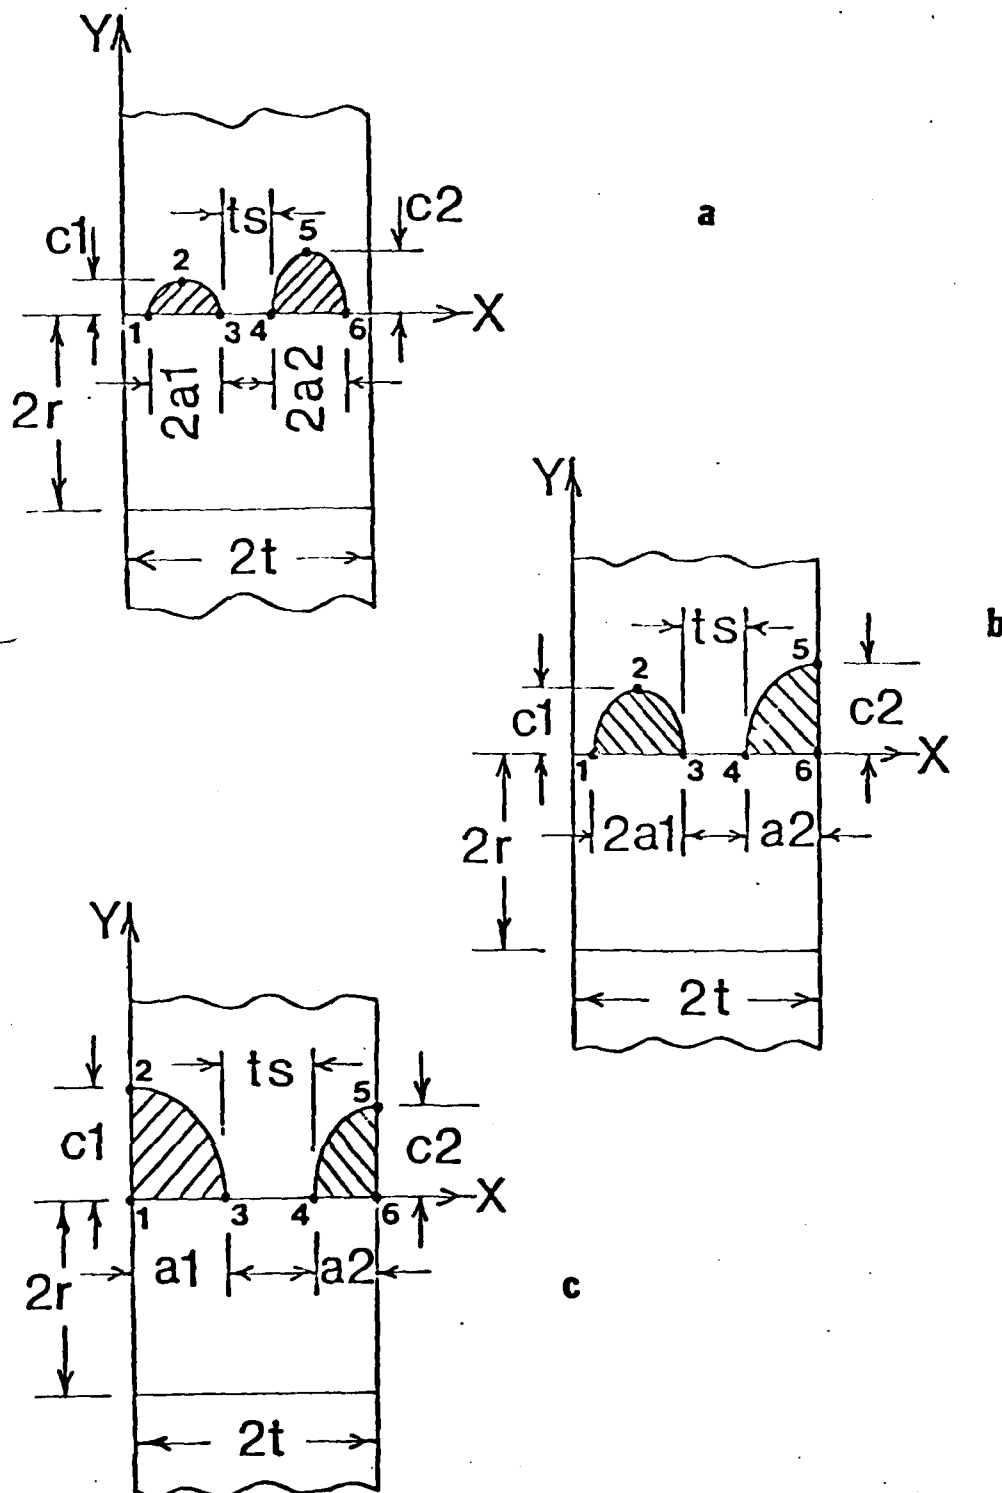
Two cracks at the bore of a hole defining crack lengths and crack tip locations.
